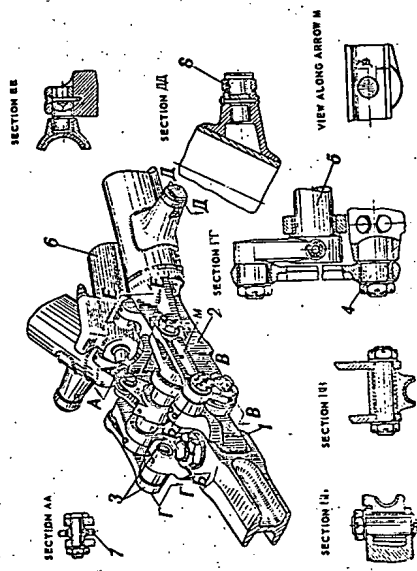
LOCK OF LANDING GEAR NOSE LEG COLLAPSIBLE STRUT 1 - stop mechanism; 2 - lock engaging link; 3 - eccentric; 4 - crank; 5 - lock hydraulic cylinder; 6 - adjustable eye of lock hydraulic cylinder; 7 - roller of struts closing and opening door.
